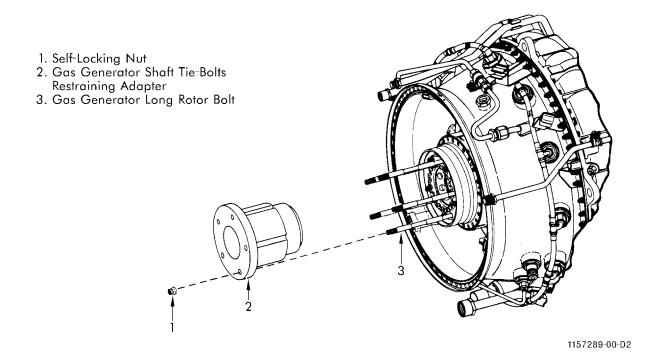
Gas Generator Shaft Tie-Bolts Restraining Adapter 21C7439P01; Removal and Installation
